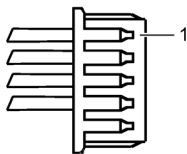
PIN assignment of 5-pin socket housing (PicoBlade)
